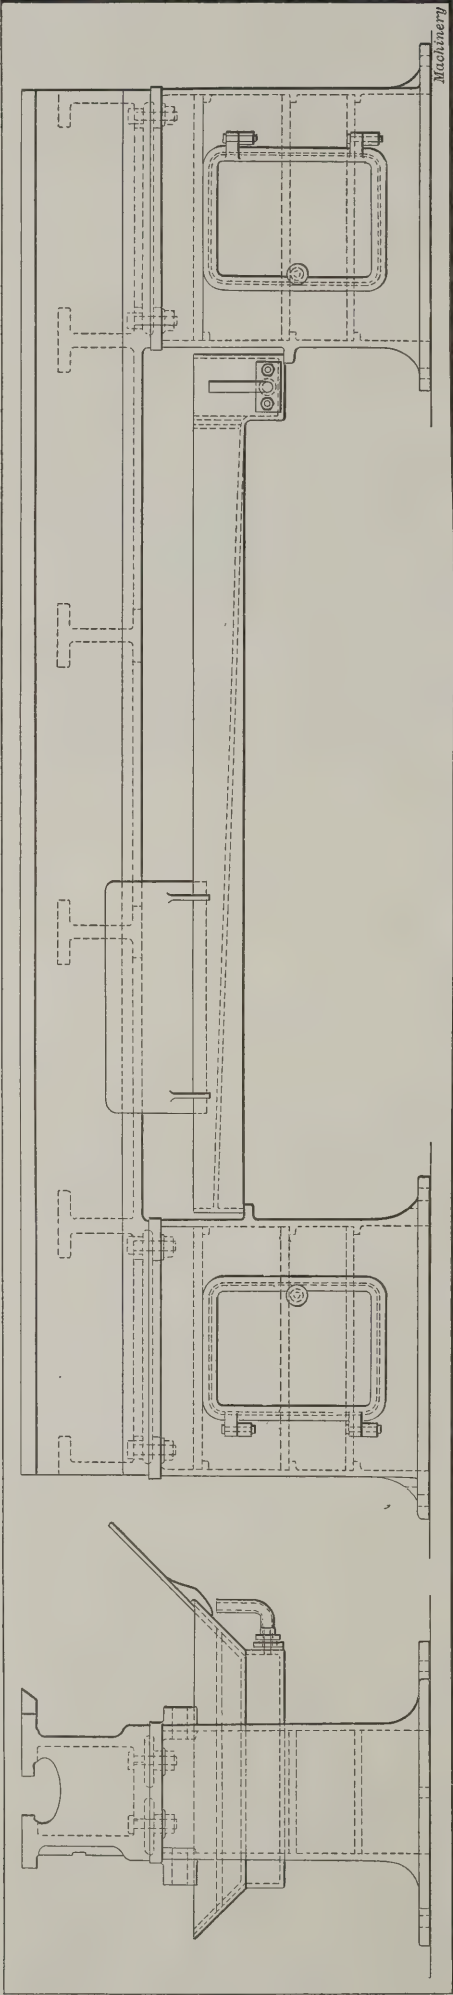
Lathe Bed supported on Cabinet Standards or Legs with Provision for Lubricating the Cutting Tool
